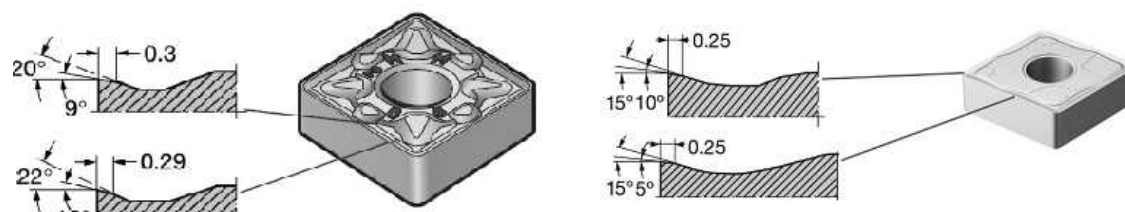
Geometry of (a) MM – standard geometry (medium feed for stainless steel) and (b) MMC – optimized medium geometry for stainless steel for high pressure coolant
